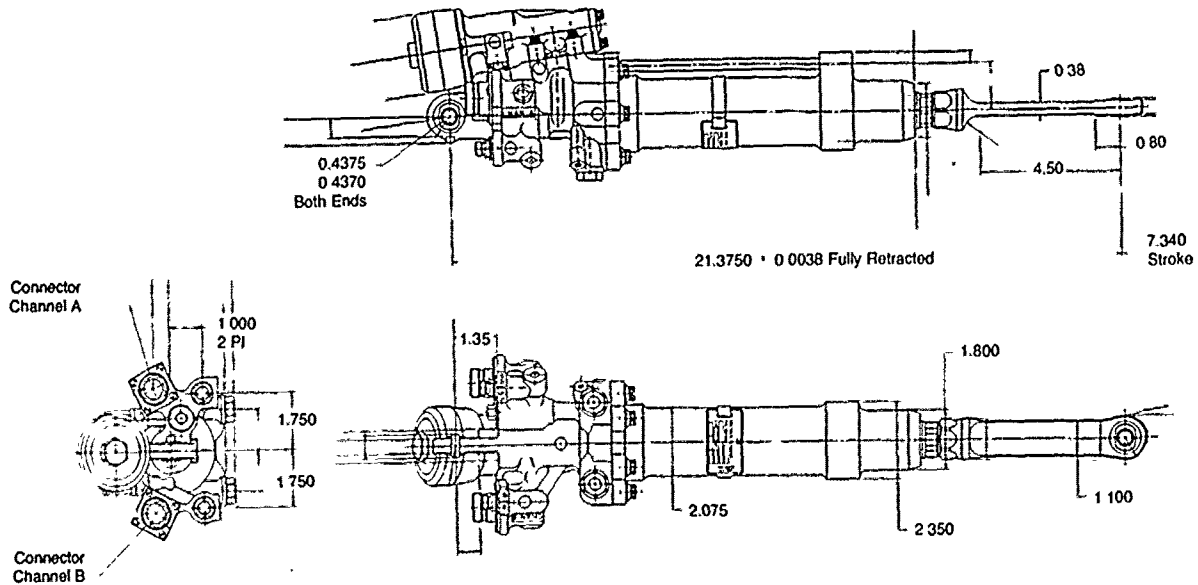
Parker Berteau - Arc Valve Actuator Outline Drawing
